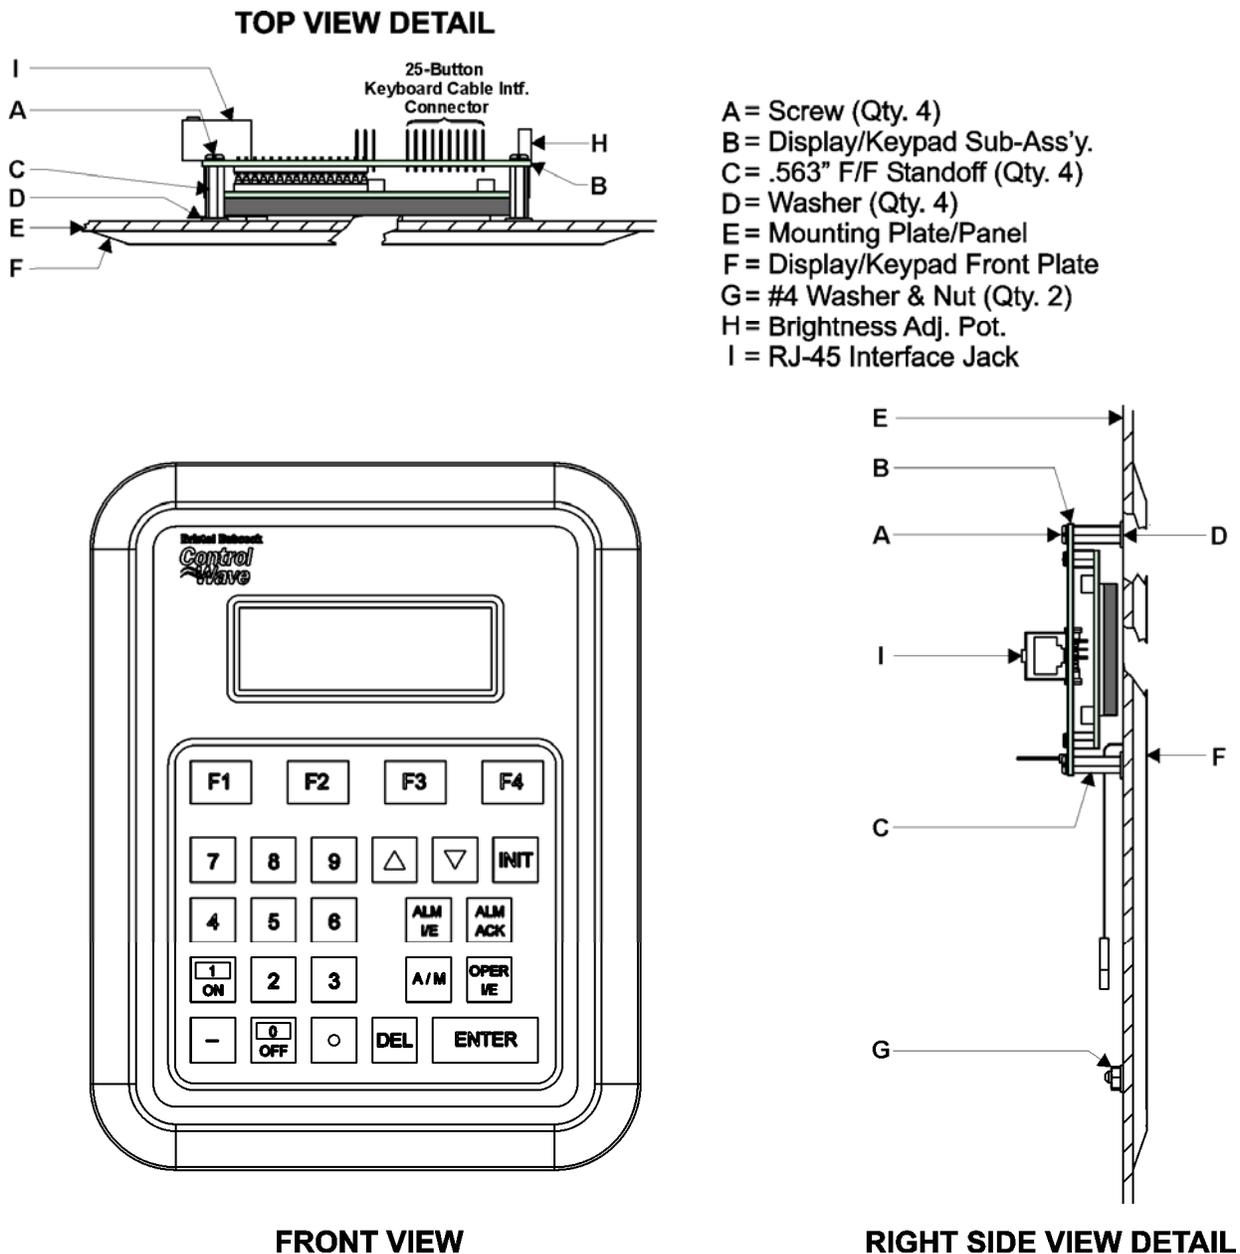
25-Button Display/Keypad Assembly Installation Drawing
